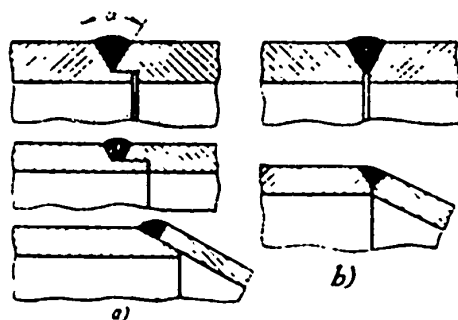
Variety of Joints in Automatic Welding with Flux of Small Products
